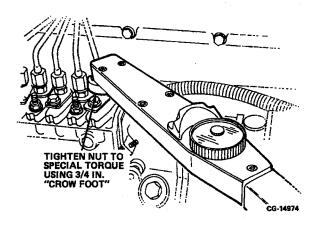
Install Injection Line Connector Nuts to the Pump Delivery Valve Holders
